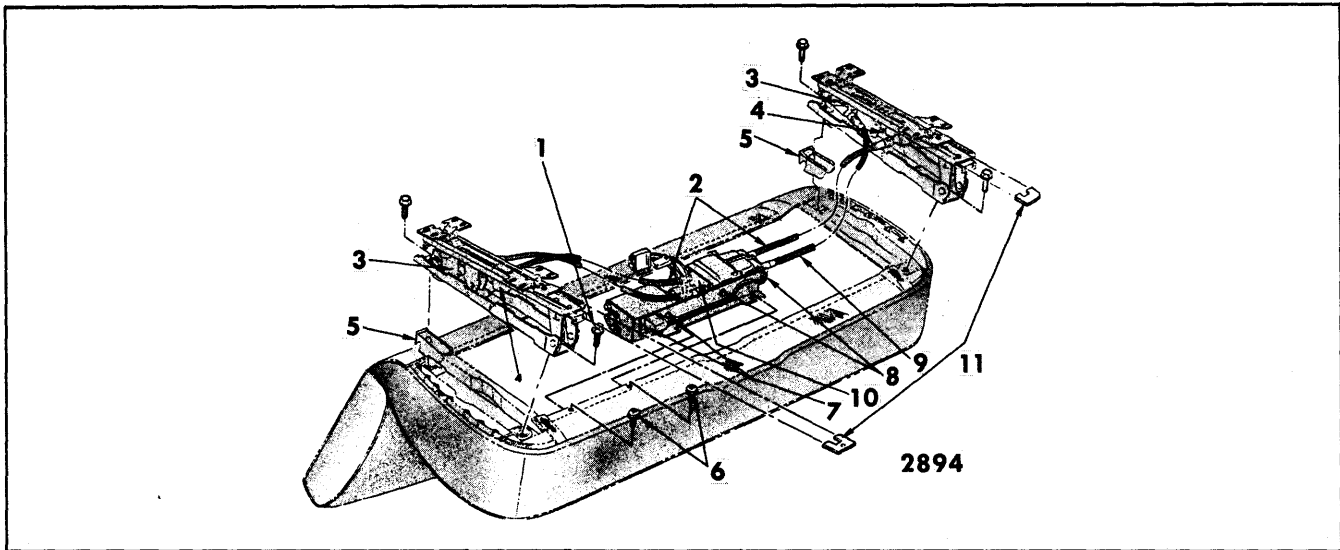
Front Seat Assembly - Four-Way Tilt - Buick "B, C & E" Styles
